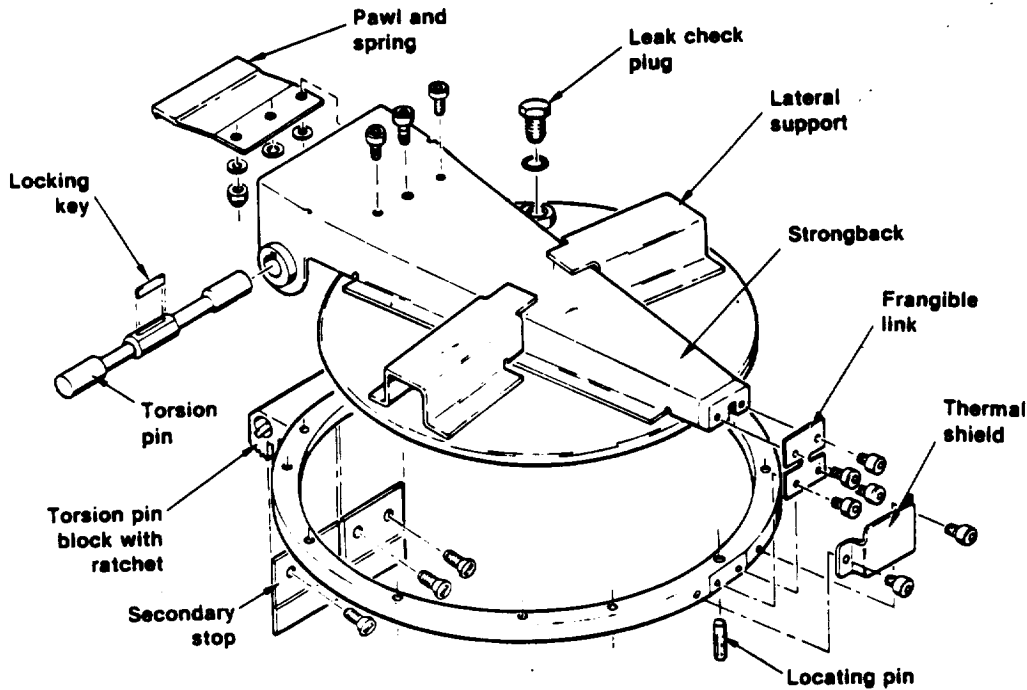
Exploded View of Forward BSM Nozzle Closure.
